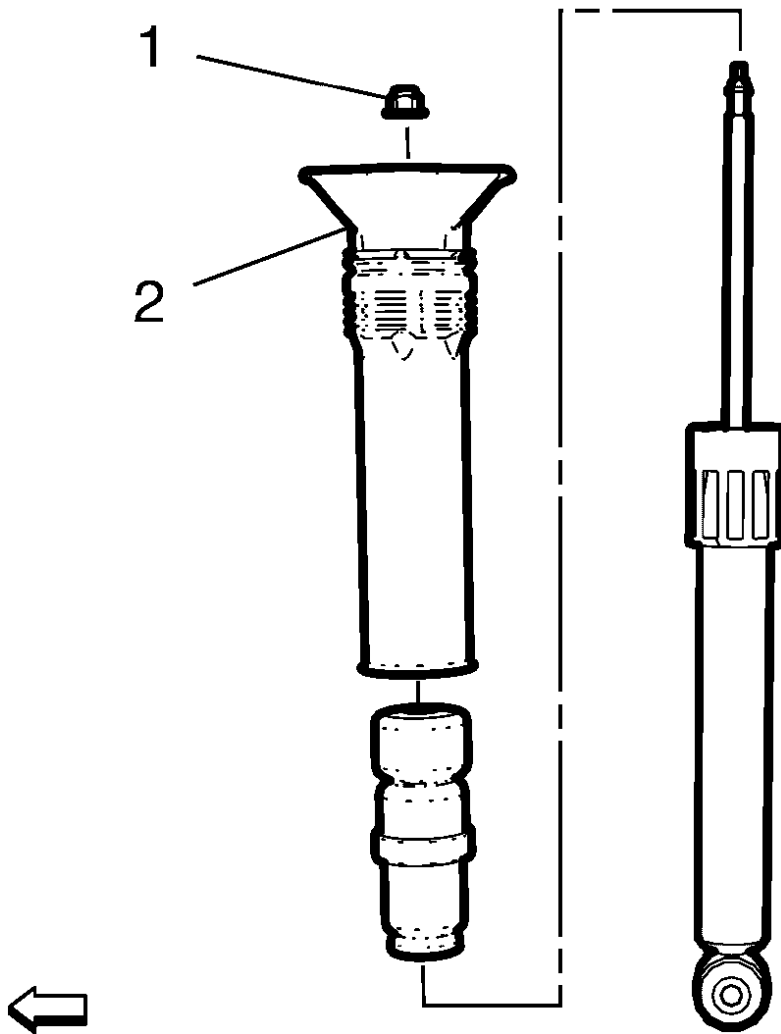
Rear Shock Absorber Nut And Upper Mount
